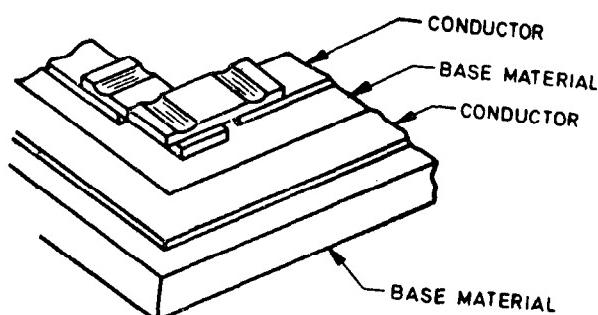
PARALLEL GAP WELDING — STRAIGHT CONDUCTOR REPAIR
